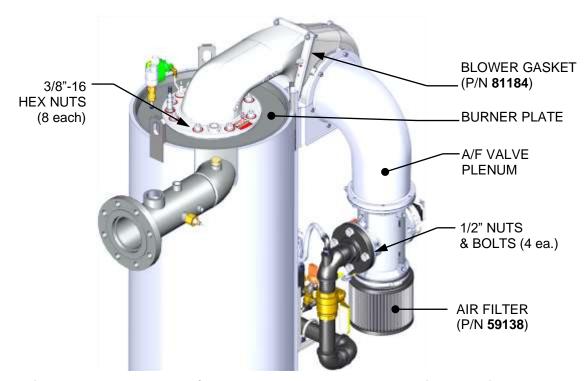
BMK1500/2000 Burner Assembly Mounting Details
